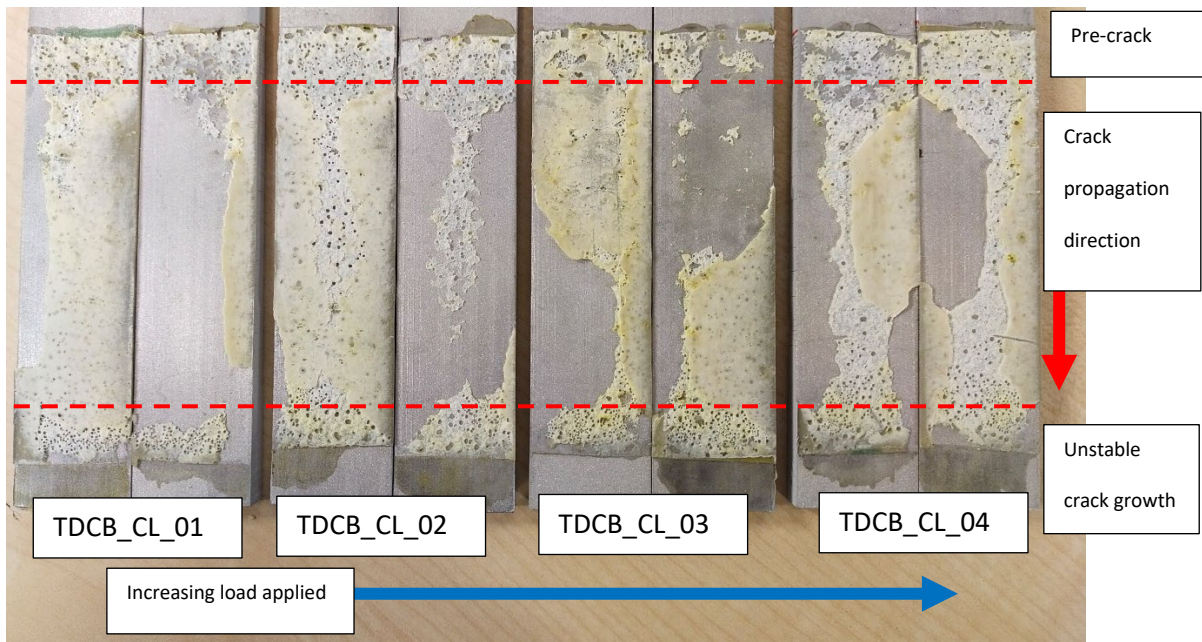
Fracture surface of the TDCB constant load specimens with from left to right increasing load applied.
